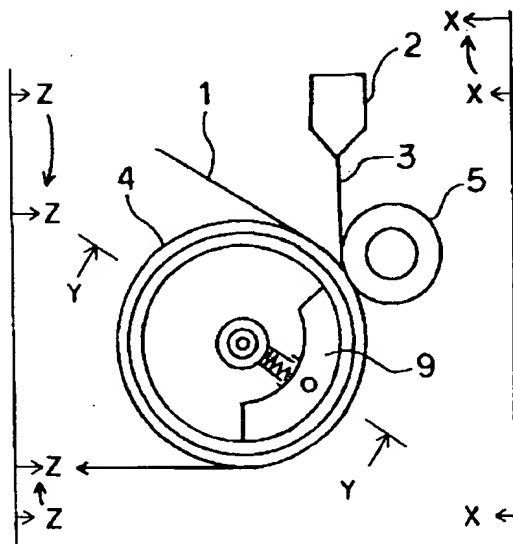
Explanatory drawing of the T die extrusion method using \*\*\*\*\* material.
